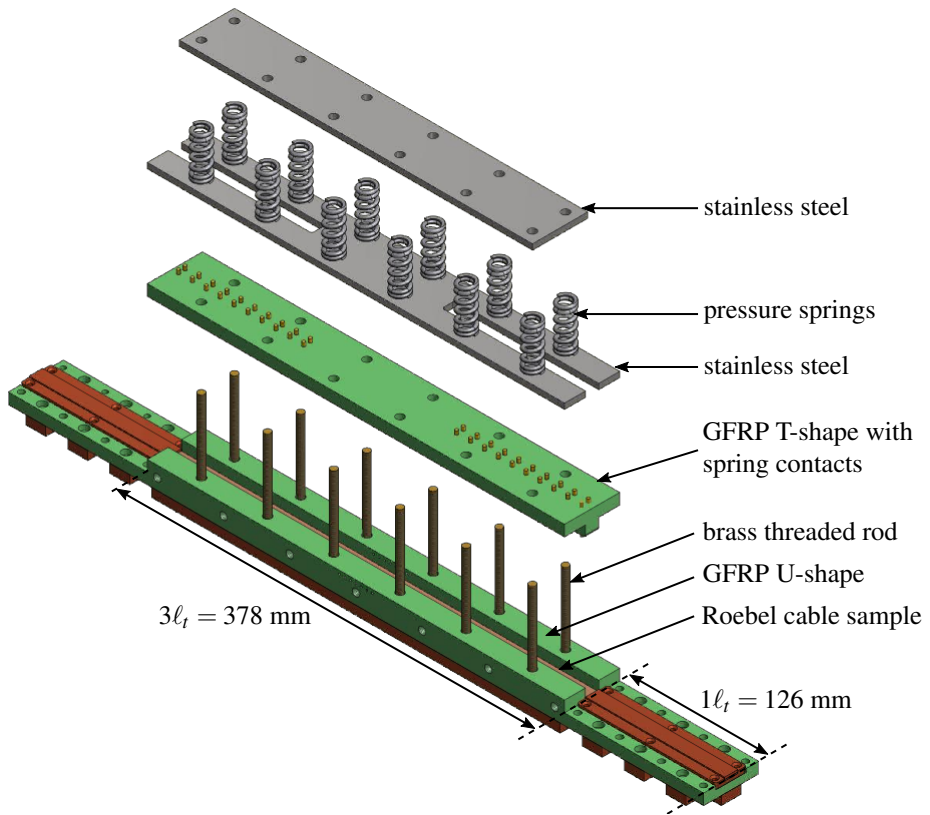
Exploded view of the sample holder with current contacts removed.
